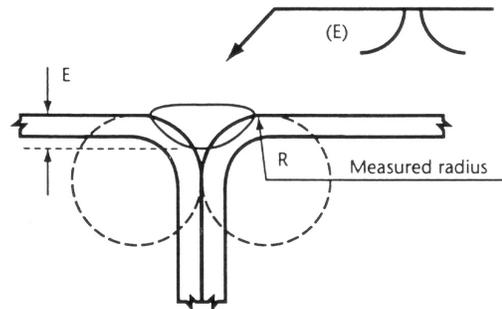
CSA W59 (2003), Figure 4.6, Partial Joint Penetration Flare-V Groove Weld in a Butt Joint (CSA, 2003).
